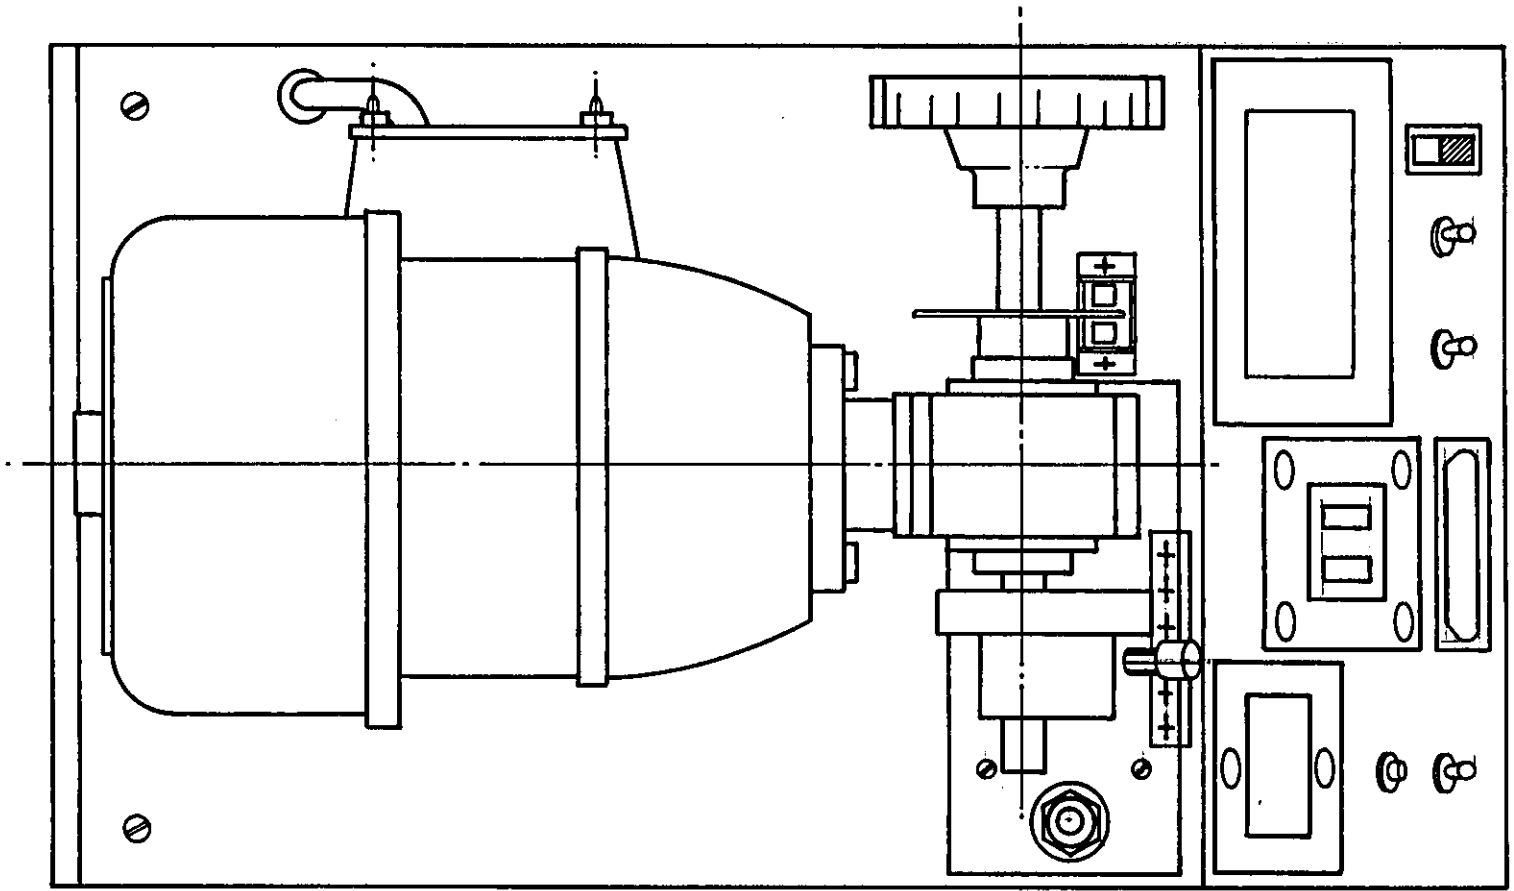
THE GENERAL ASSEMBLY, PLAN ELEVATION INCLUDING FRONT ANGLED CONTROL PANEL LAYOUT
